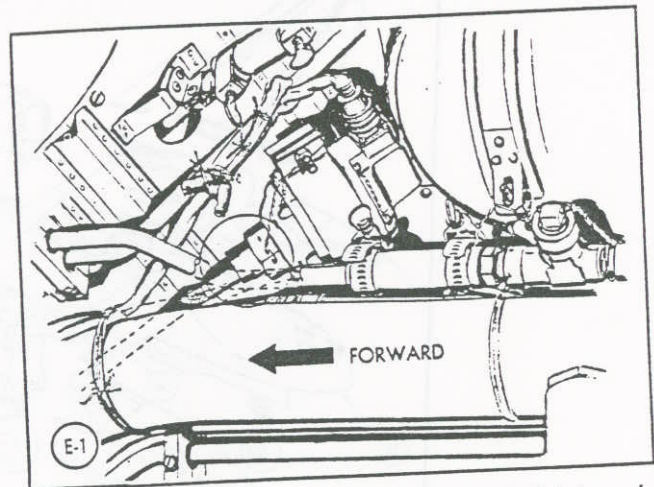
(Sheet 5 of 6 Sheets) — Lubrication Diagram
